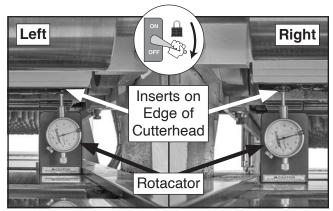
Rotacator placed under inserts on edge of upper cutterhead.
